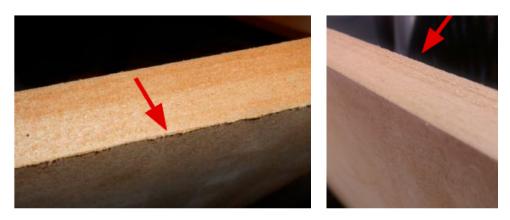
Example of a panel with a damaged cut line due to a worn tool
